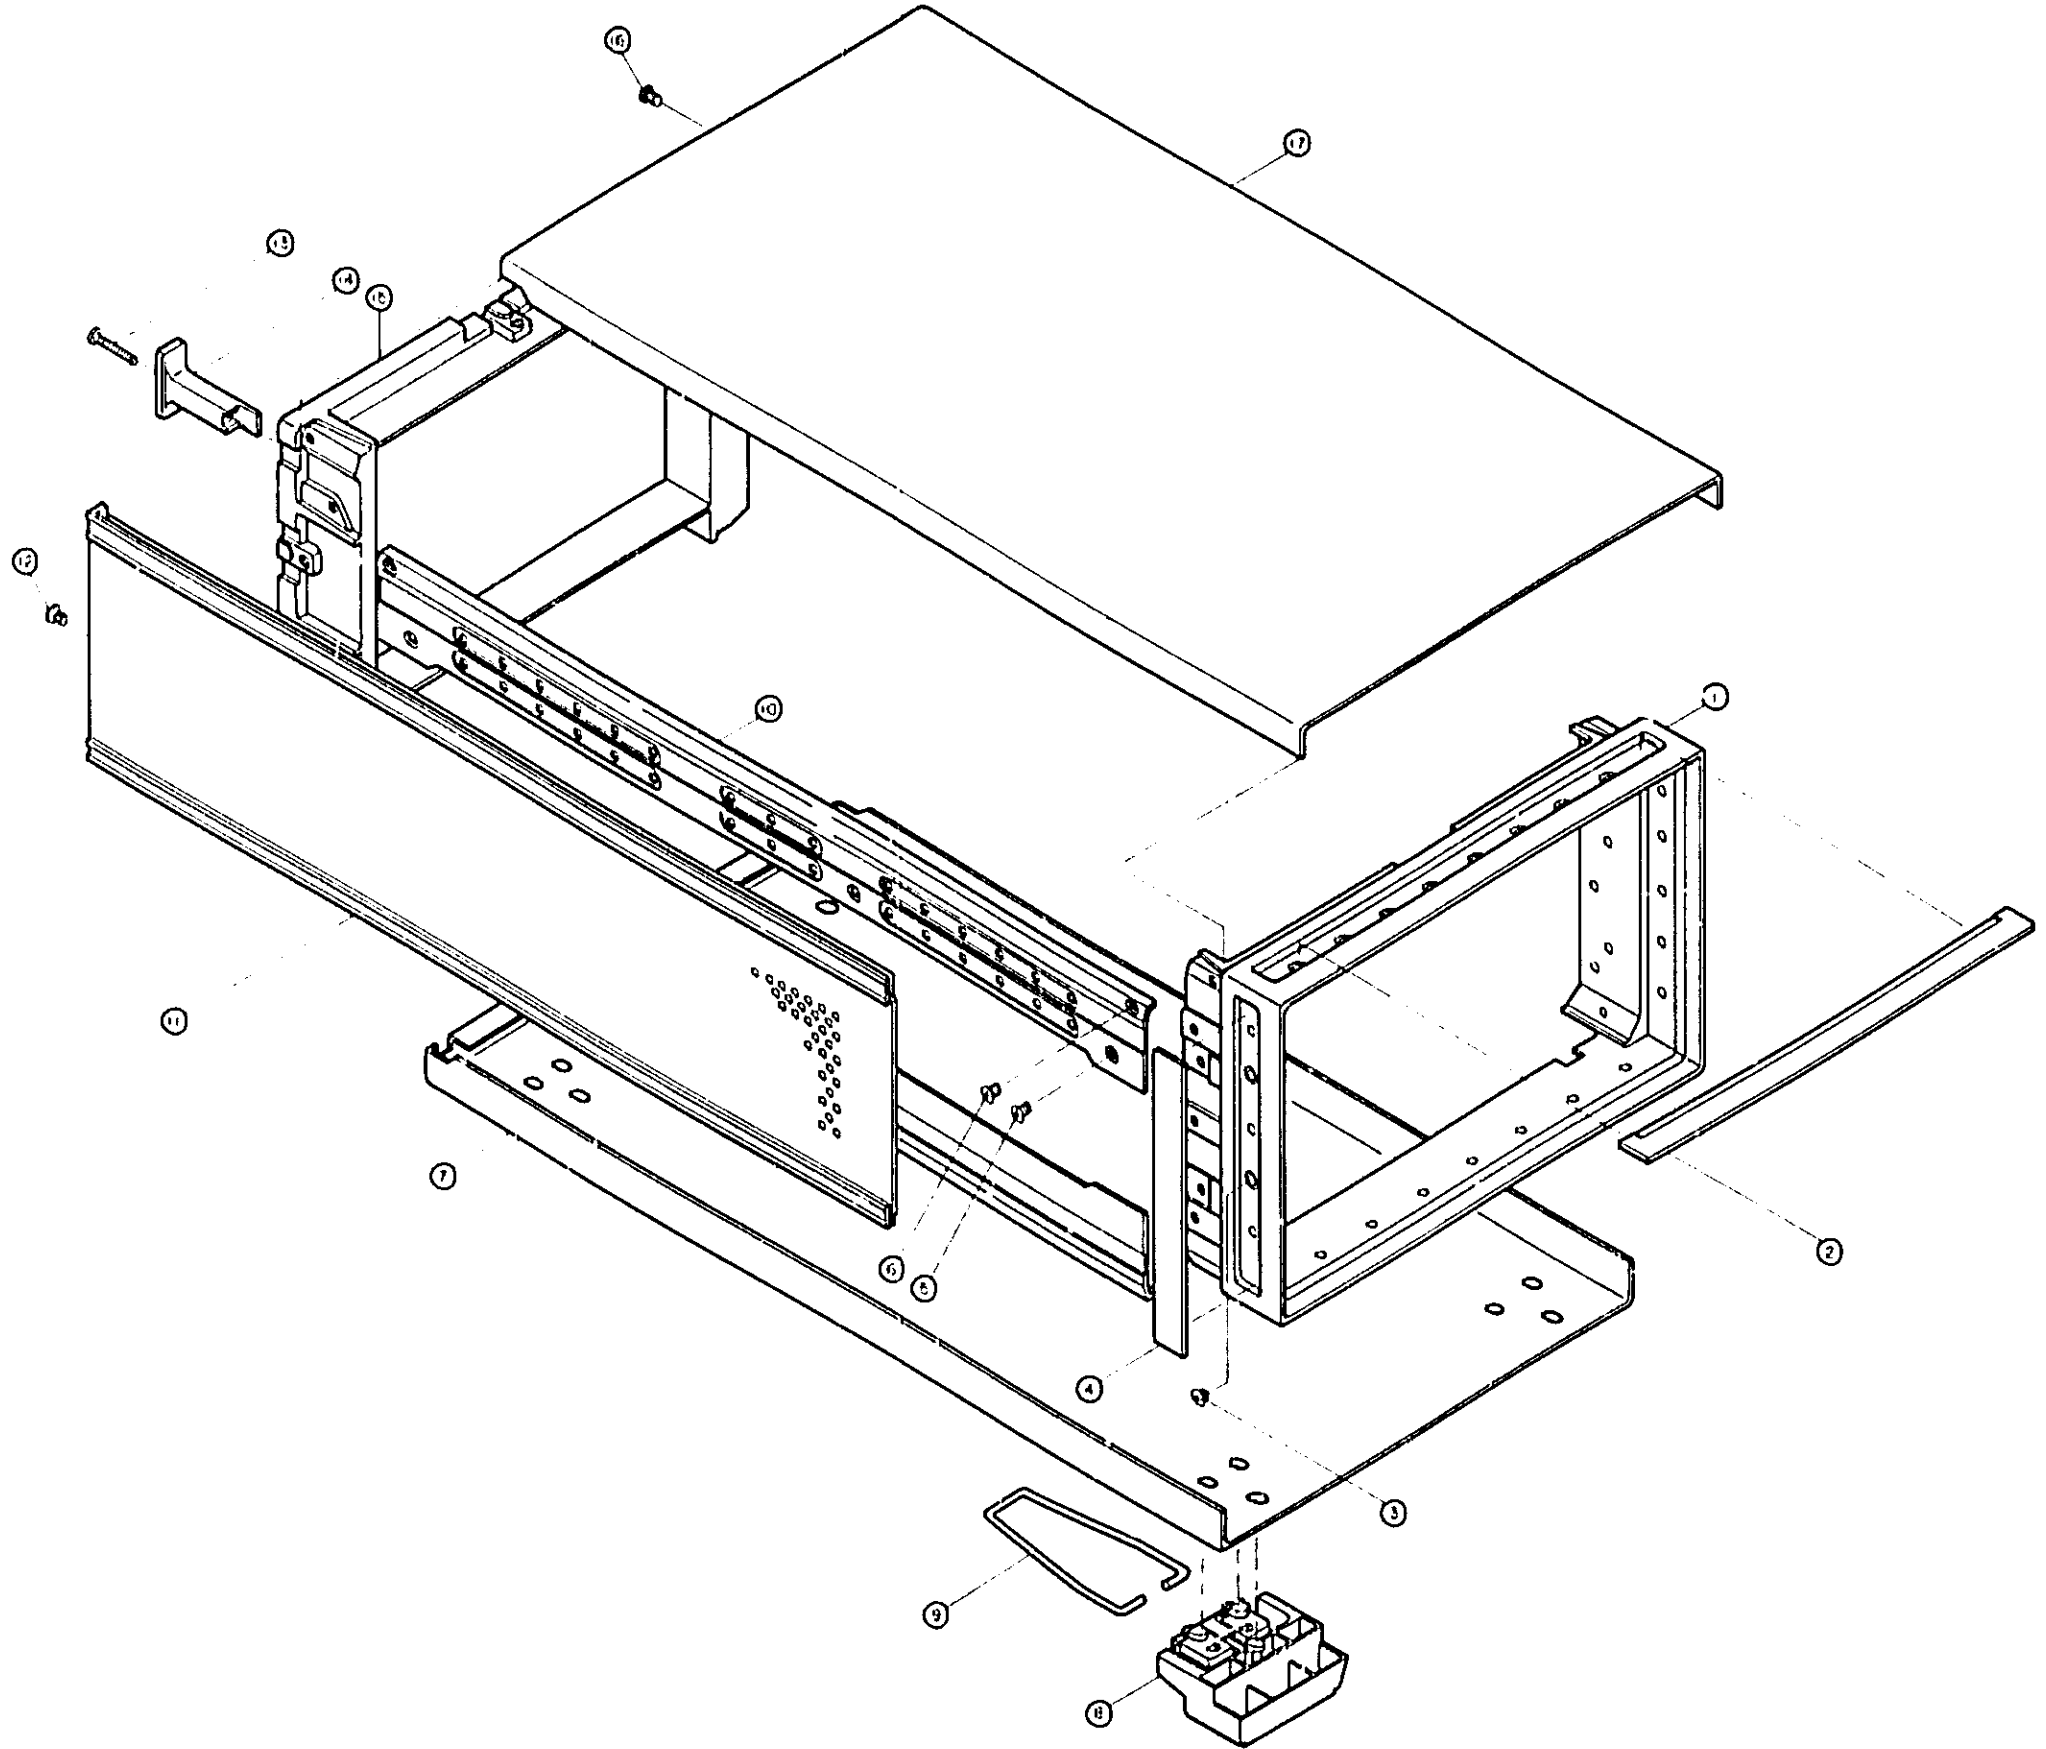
HP 2804A Mechanical Parts, Exploded View
